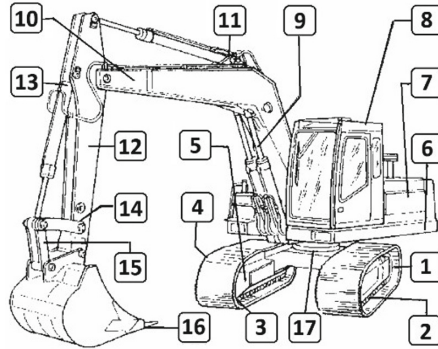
Main parts of hydraulic excavator RKE-2600 [4] (1—track drive wheel, 2—track guide rollers, 3—track tension wheel, 4—tracks, 5—hydraulic motor, 6—superstructure, 7—covers with sound protection, 8—cabin with control devices, 9—lifting cylinder, 10—excavator boom (boom), 11—cylinder for penetration, 12—grab holder, 13—grab cylinder, 14—grab lever, 15—connecting rod, 16—gripper, 17—main bearing)
